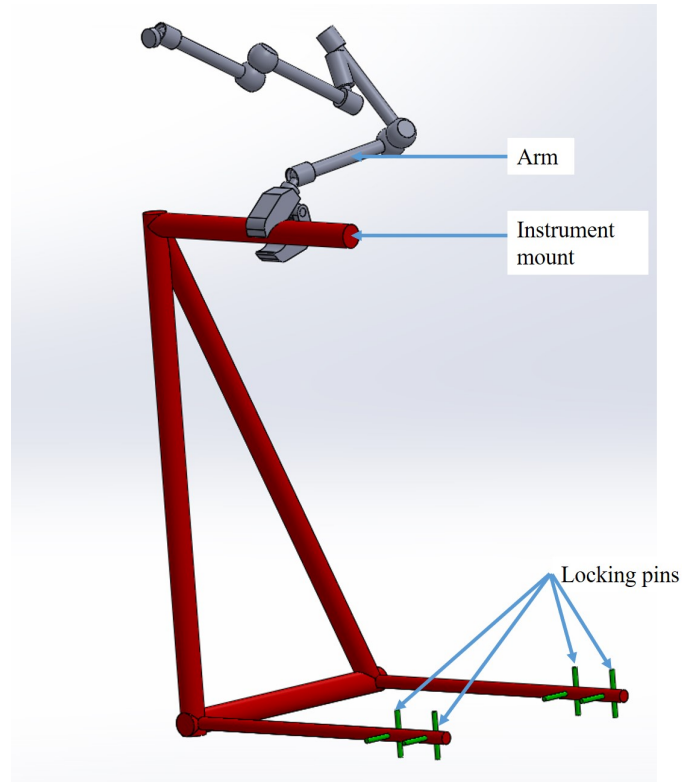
SOLIDWORKS CAD design of the instrument mount
